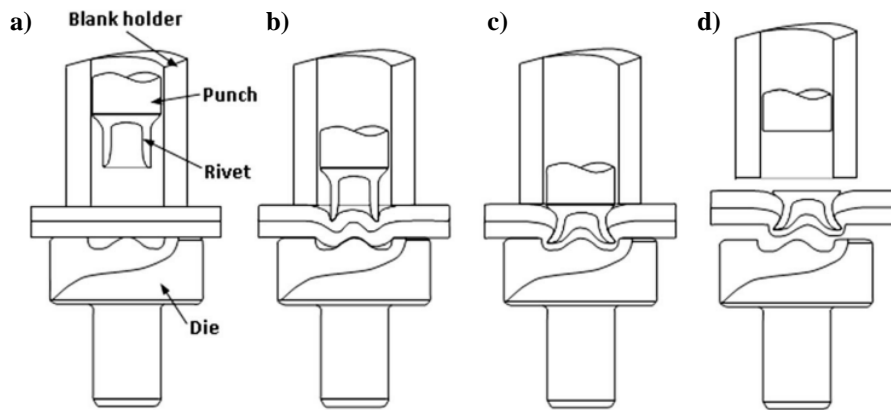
Self-pierce riveting process illustration. (a) Clamping; (b) Piercing; (c) Flaring; (d) Releasing. Adapted from [28].
